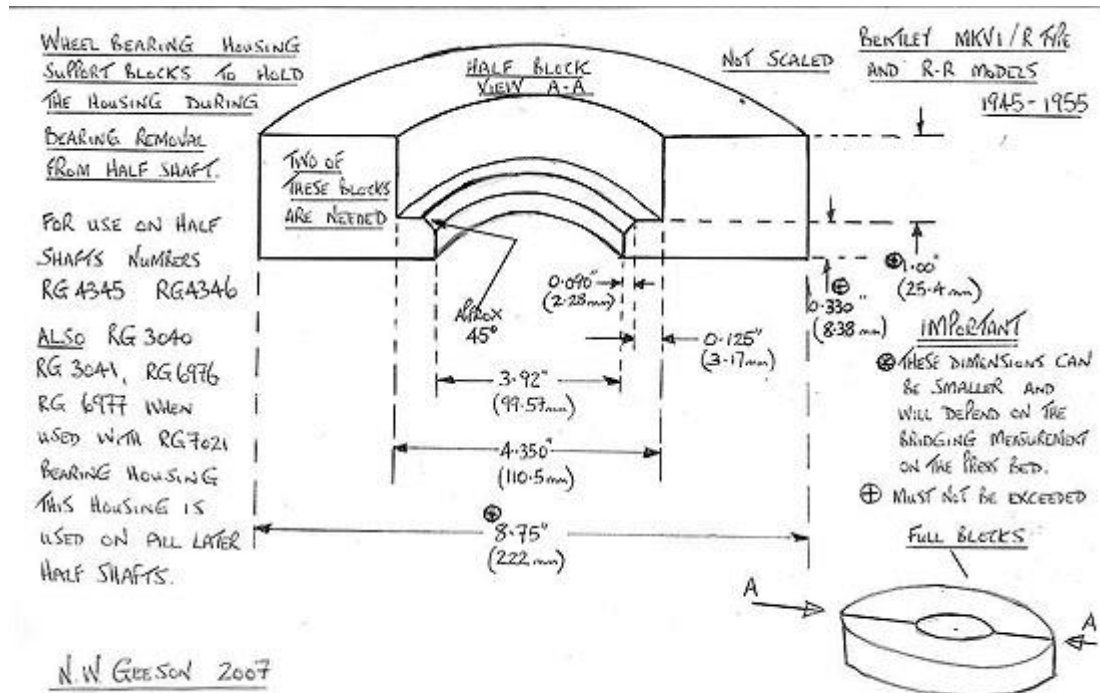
The relevant dimensions needed to make a set of support blocks in a lathe
